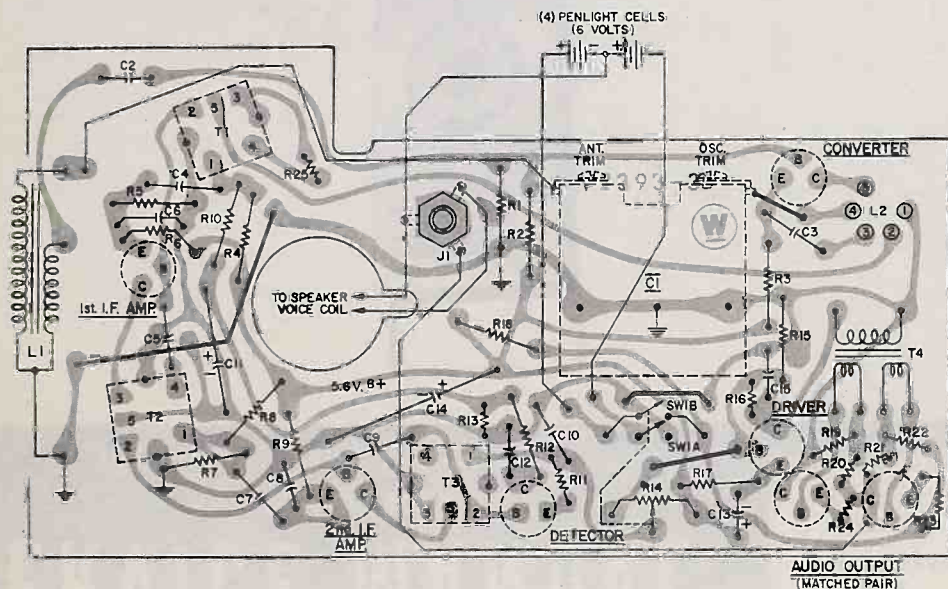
Bottom view of printed circuit chassis with components shown as electrical symbols.
